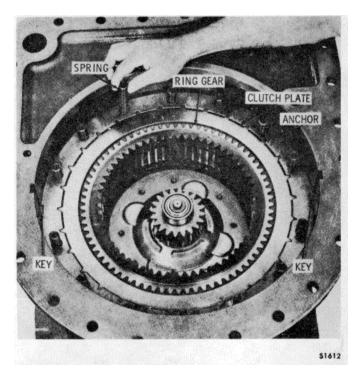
Removing First-and-Second-Gear Clutch Piston Return Springs.
